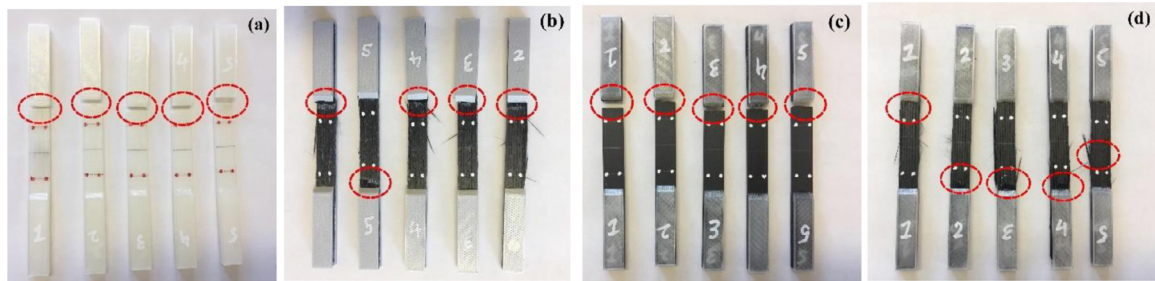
Fractured samples after performing tensile testing (a) PLA (b) PLA-CCF (c) PLA-SCF (d) PLA-SCF-CCF.
